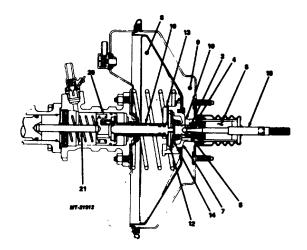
DPB Booster Vacuum Booster in Applied Position.
